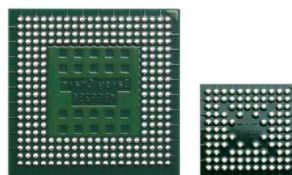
0.5-mm MBGA Package Footprints (Left: 256 Pin; Right: 100 Pin)
